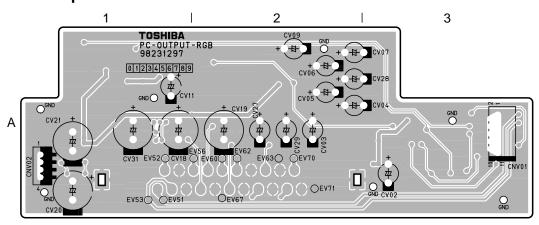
EU09 Output-RGB PC Board (Top side)
